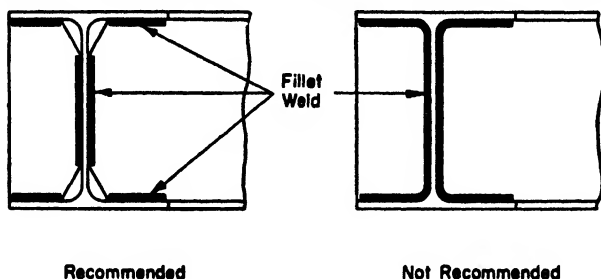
Example of a change in design of a junction of two I-beams which reduces rigidity and simplifies welding.
